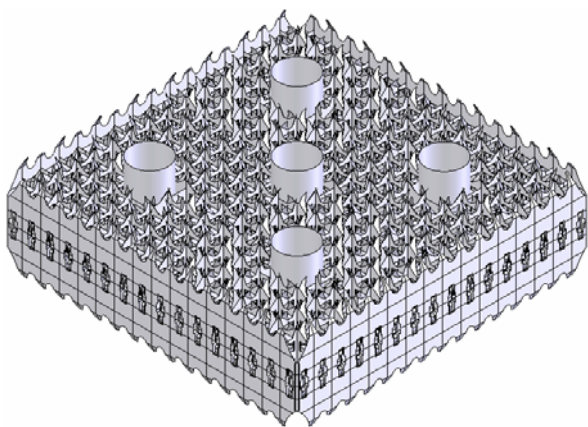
Spacer grid assembly for ABB-CE type fuel
